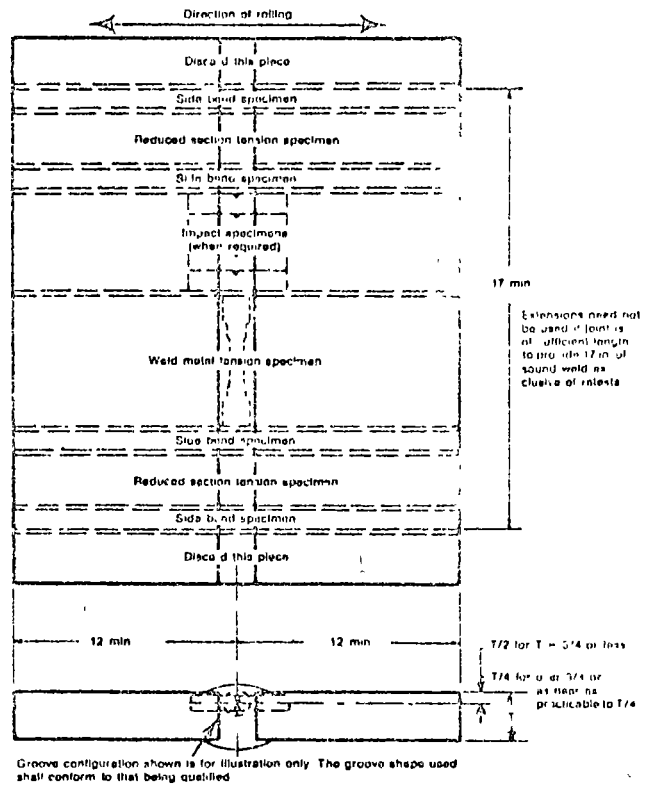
Location of test specimens on welded test plate—electroslag and electrogas welding—procedure qualification.
